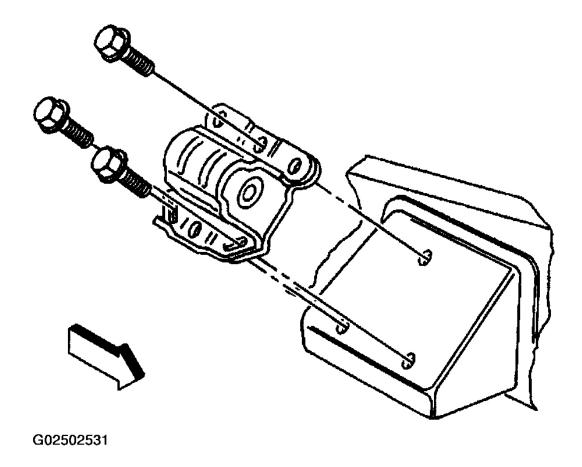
Installing Engine Mount (AWD Vehicle - Left Side Shown) Courtesy of GENERAL MOTORS CORP.
